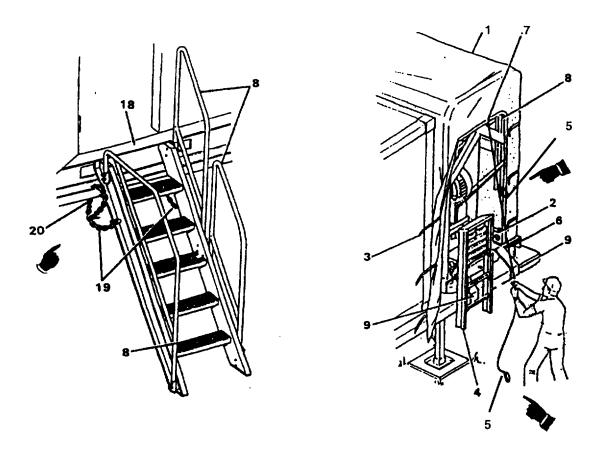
Unloading the ROWPU (Sheet 1 of 3)
